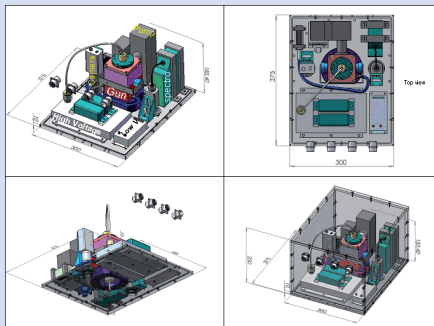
02 - EBF final assembly design for the laboratory prototype
